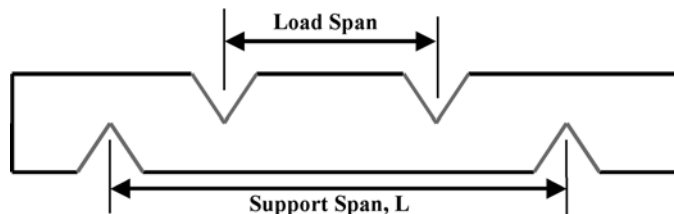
Fixture Used to Align Loading Noses and Supports
